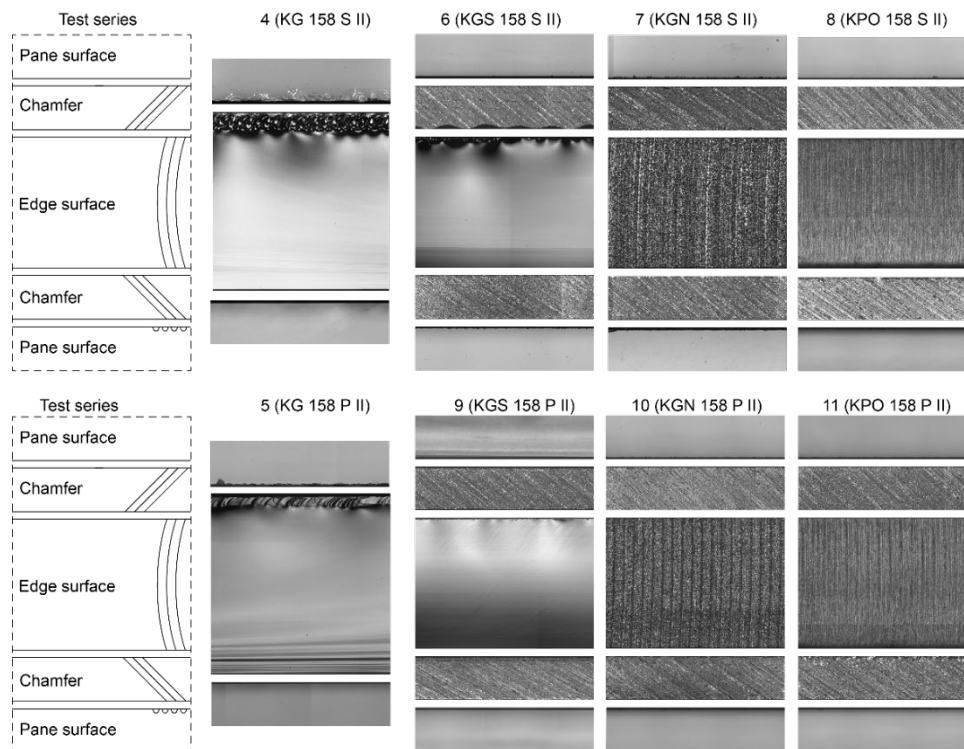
Microscopic images of the cut edge and further processed test series, cut by different cutting wheels
